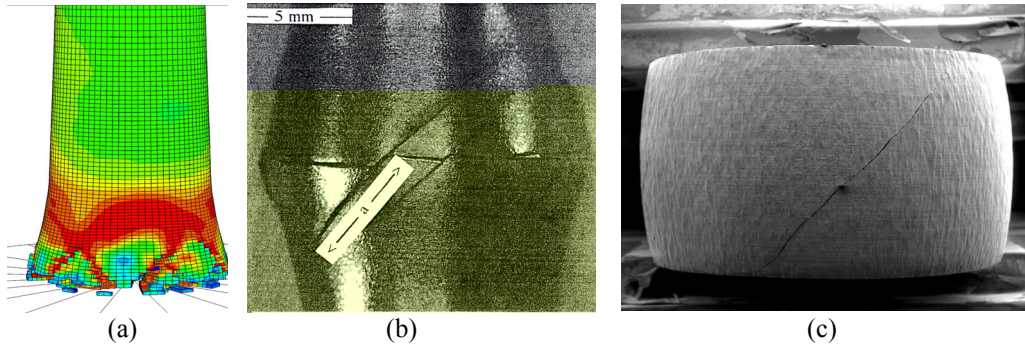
Shear cracking in the Taylor test (a): Numerical simulation, (b) Experimental results by Couque[9], (c) Fracture in upsetting tests (Courtesy of Bao and Wierzbicki [3]).
